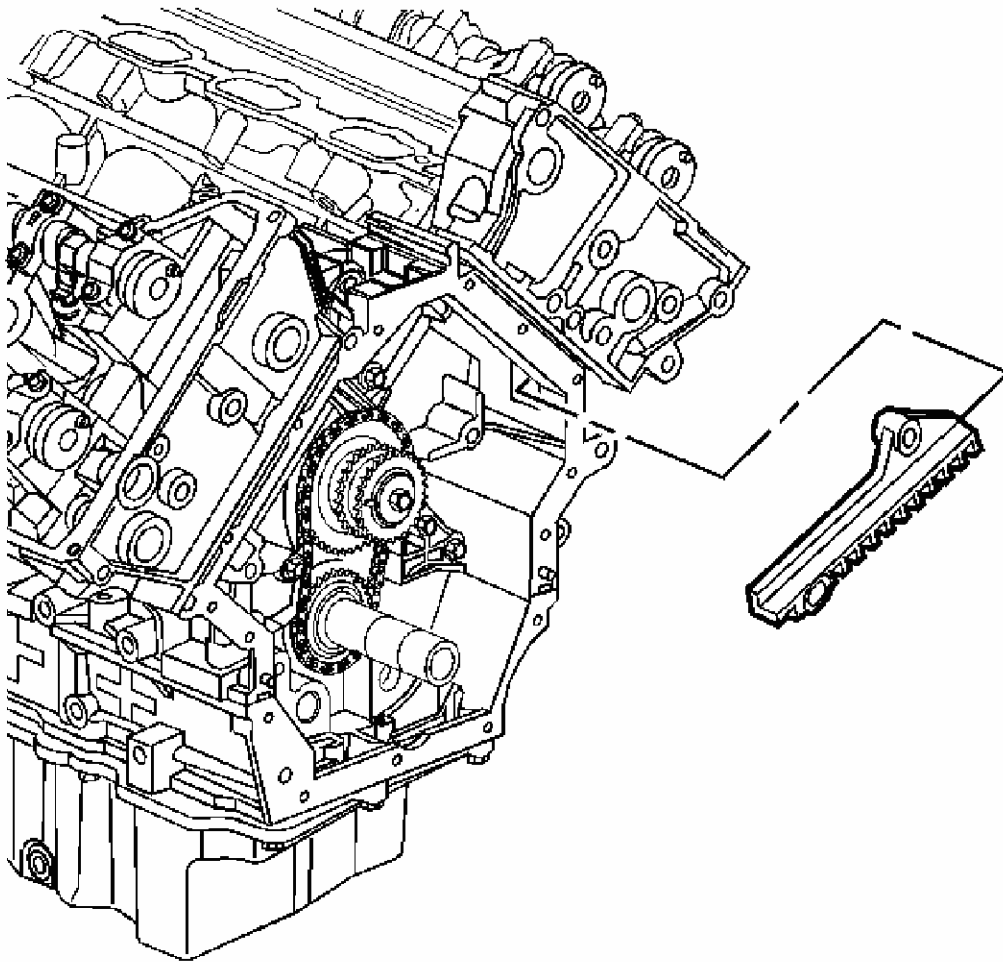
Left Secondary Camshaft Drive Chain Guide
